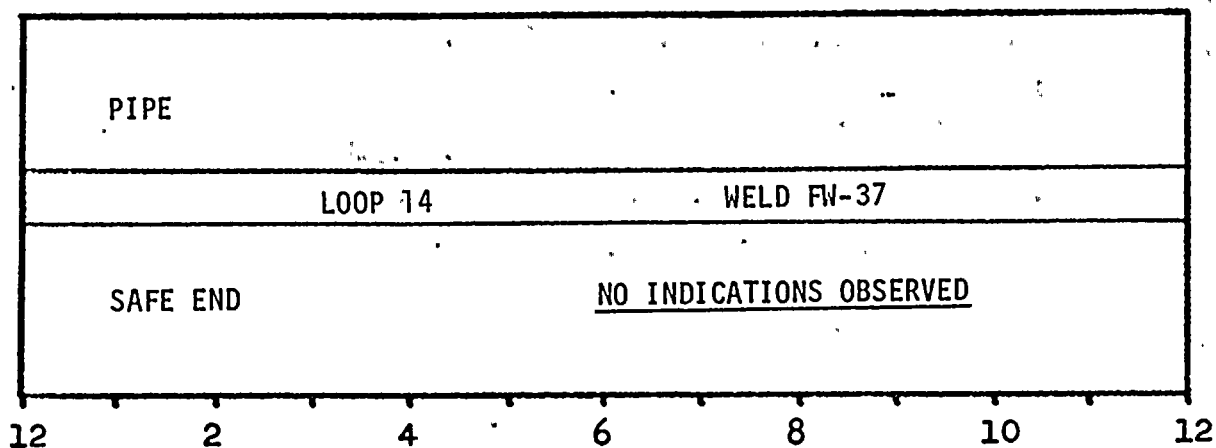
(Continued) Dye Penetrant inspection results, Loop 14 welds. (Refer to Figure 4 for weld locations.)
